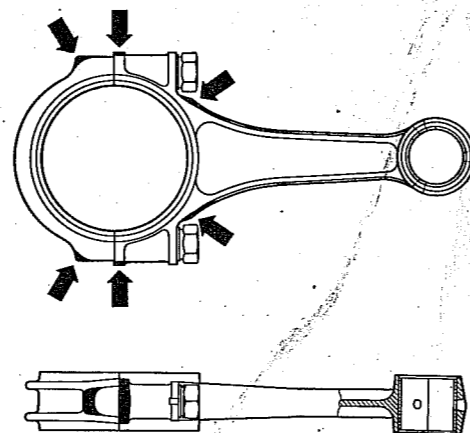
If balancing of the connecting rods is necessary, remove metal from points indicated.
